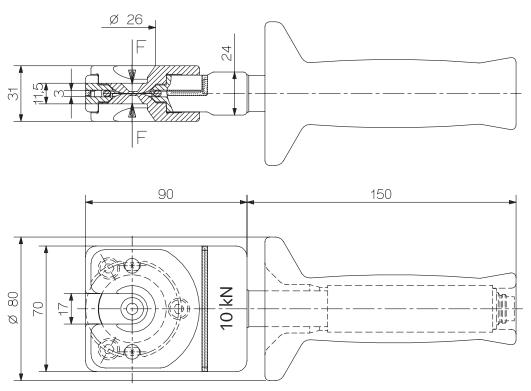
Welding force sensor Type 9831C... with charge amplifier included and plastic handgrip (removable)
